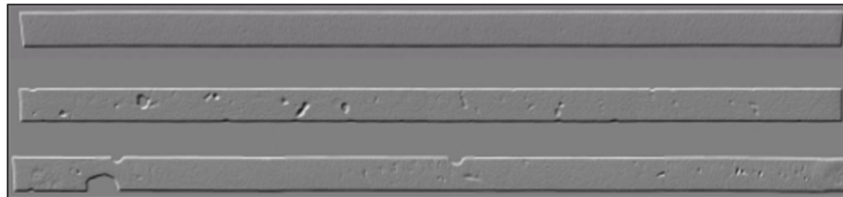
X-Ray Inspection of Solder Test Specimens (Good and Bad Samples)
